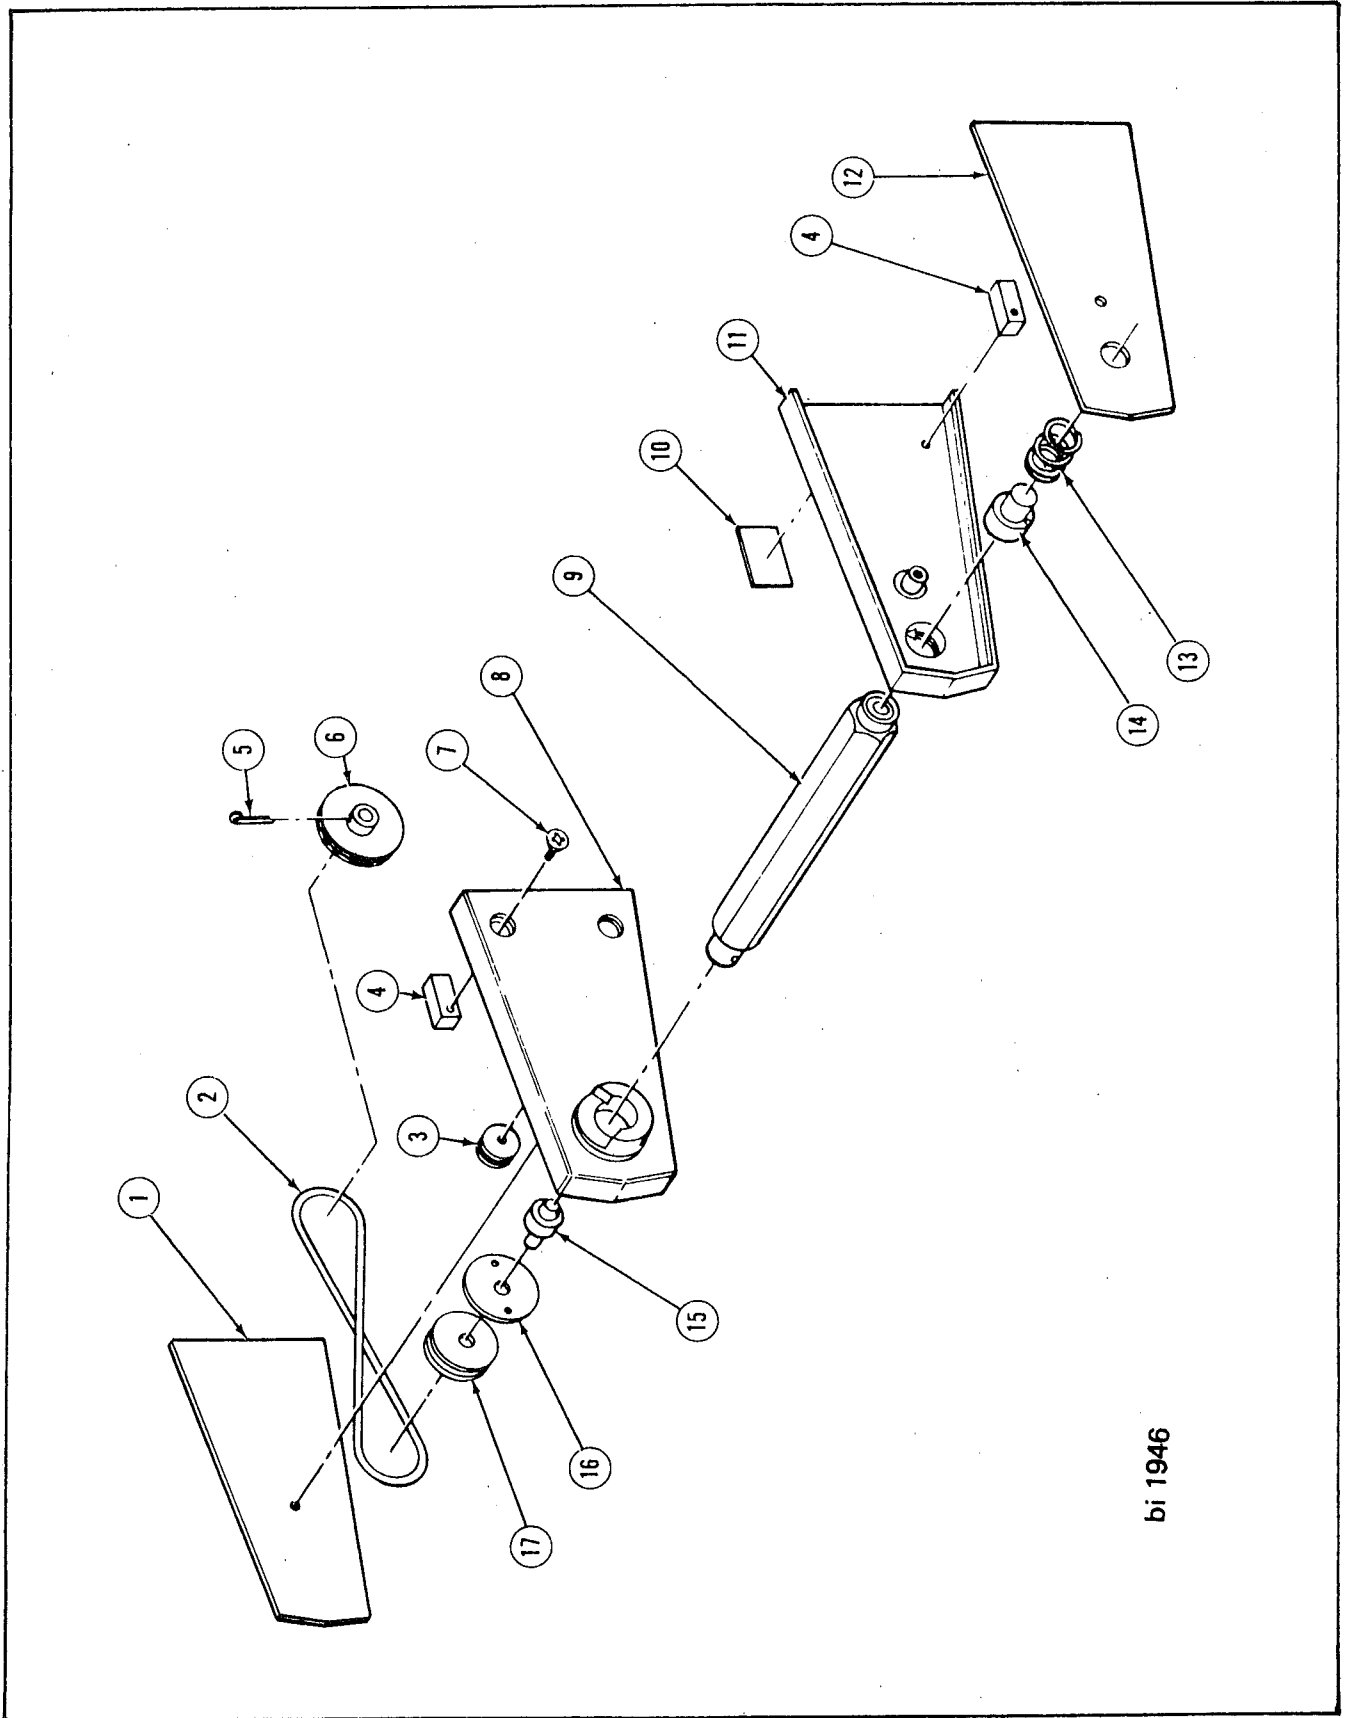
CHART TAKE-UP ASSEMBLY
